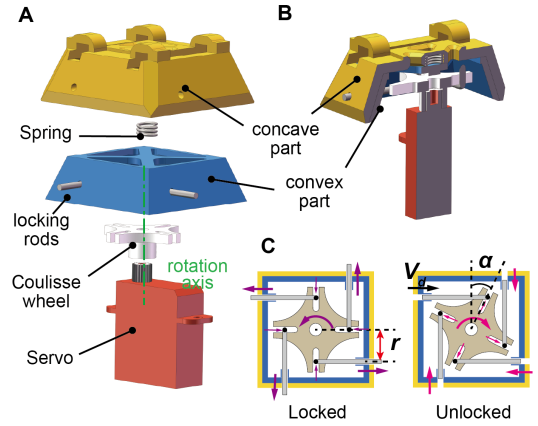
Illustration of docking and locking mechanism. (A) Cross-sectional view and main components of designed docking mechanism in the locked state. (B) Top view of the locking mechanism in the locked state and the kinematic relationship of each part.
